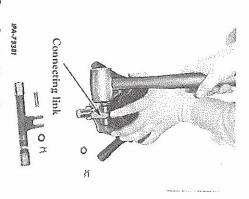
Installing Camshaft Connecting Link Pin (Long)
